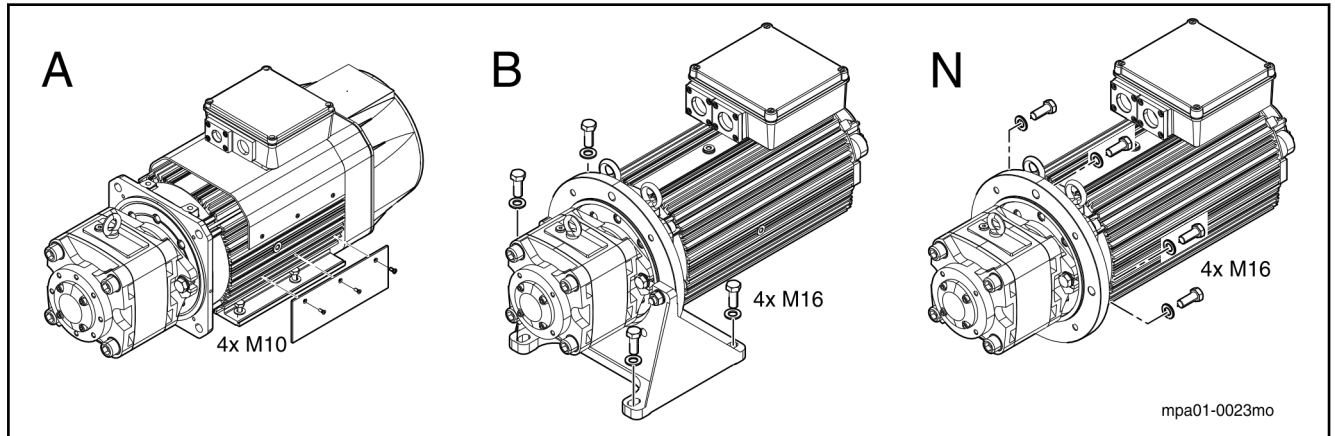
Assemble motor-pump-unit MPA01 into the construction.
